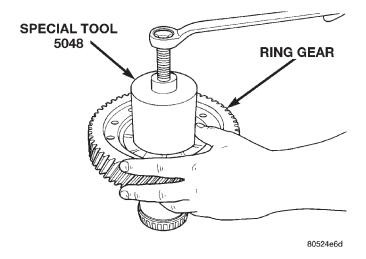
Remove Differential Bearing Cone (Ring Gear Side)
